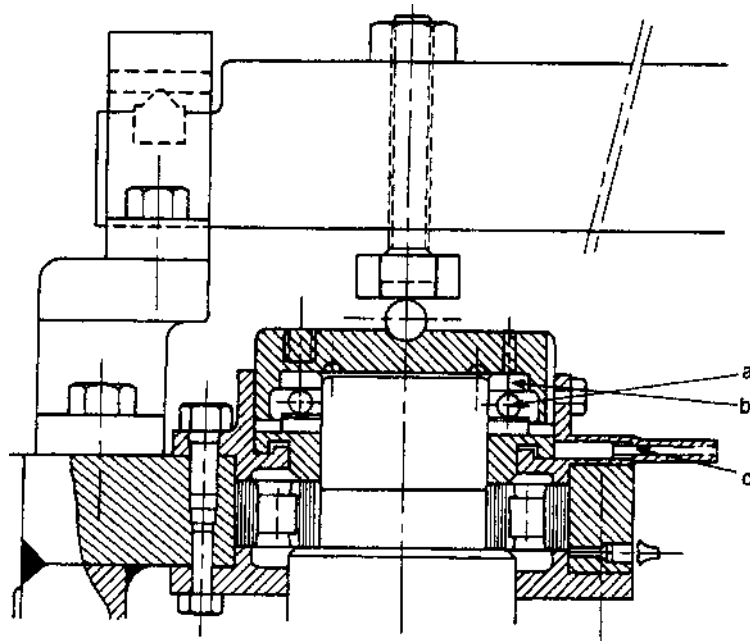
Section view of Unisteel bearing fatigue rig (a) ball; (b) test bearing; (c) standard thrust race. (From Ref. 5.)
